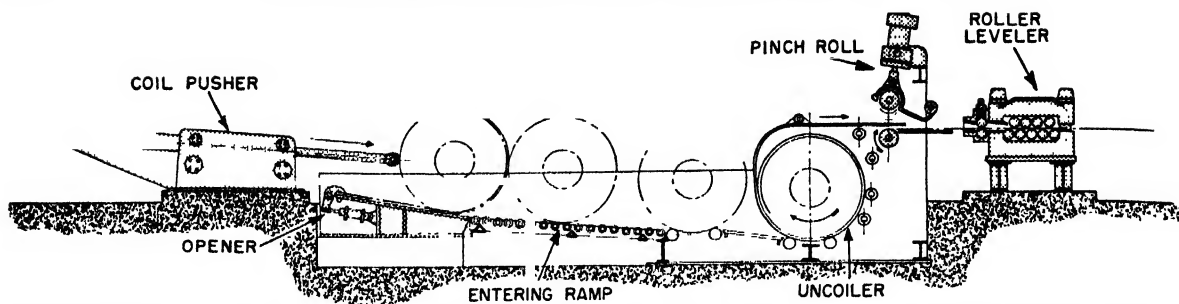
Schematic elevation of coiled-skelp handling equipment at the entry end of a continuous butt-weld pipe mill.
